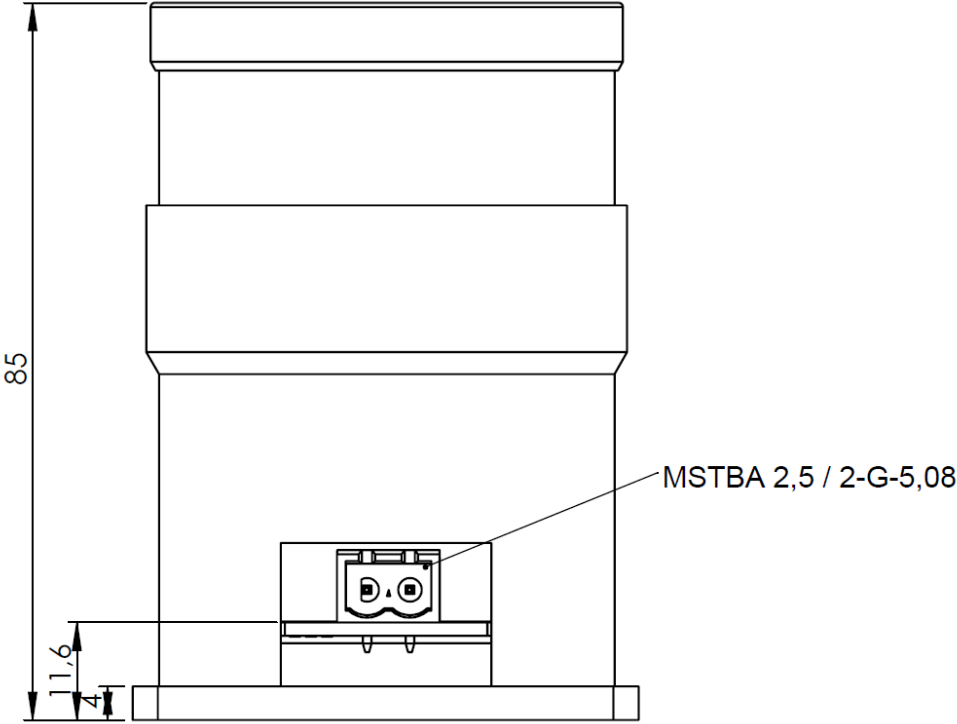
Mechanical drawing GPSS 118 – 24 CD
